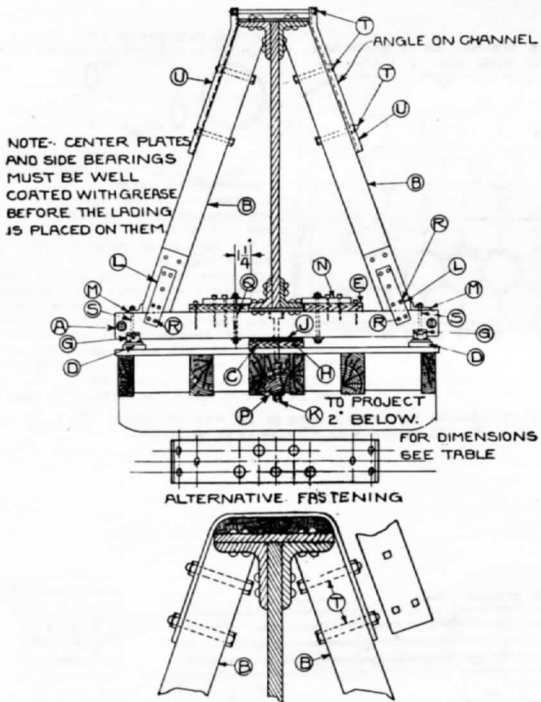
LOADING OF GIRDERS IN VERTICAL POSITION ON TWO OR MORE CARS.
